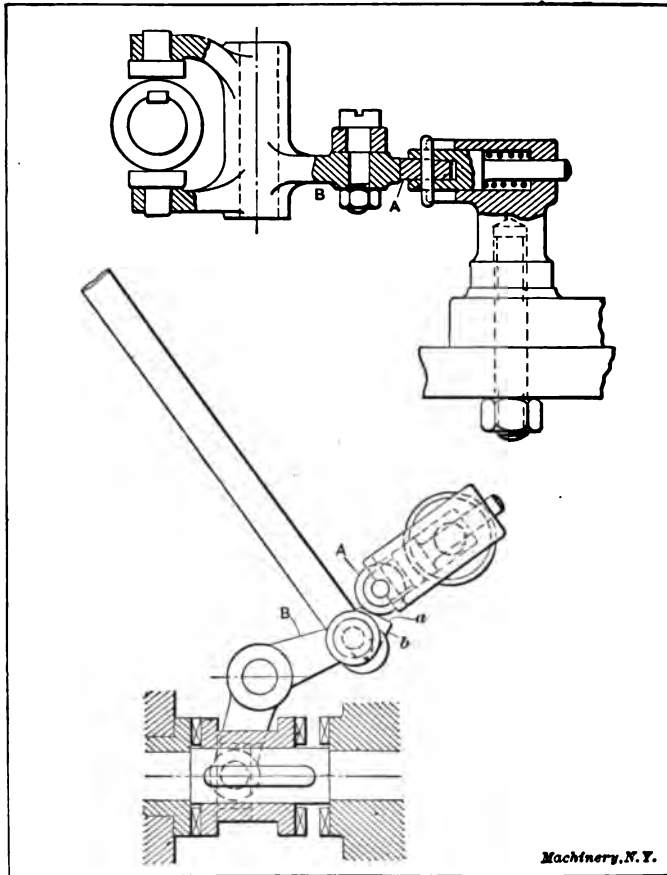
Spring Plunger applied to Clutch-reversing Mechanism
